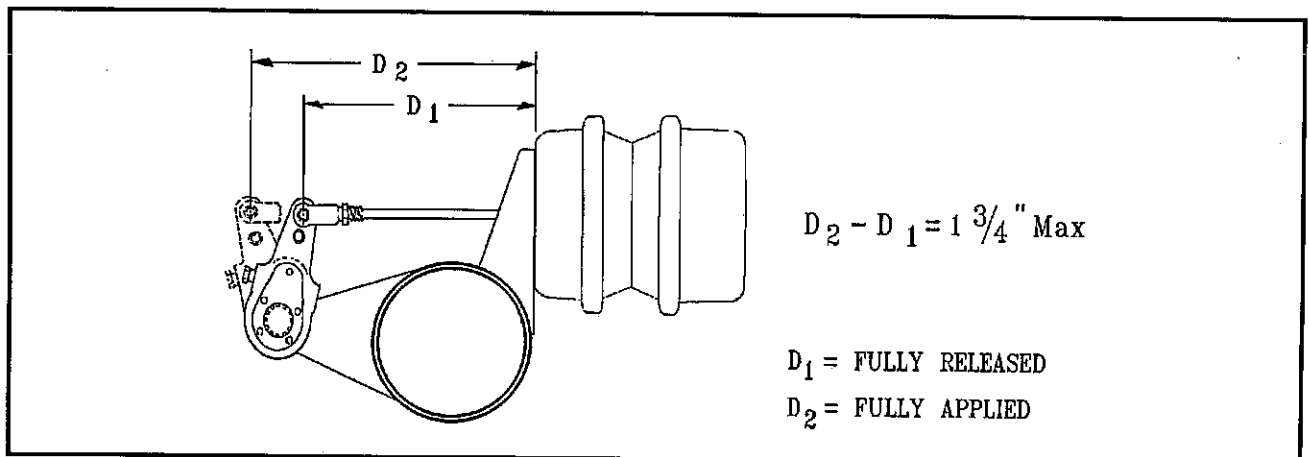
CHECKING BRAKE ADJUSTMENT
